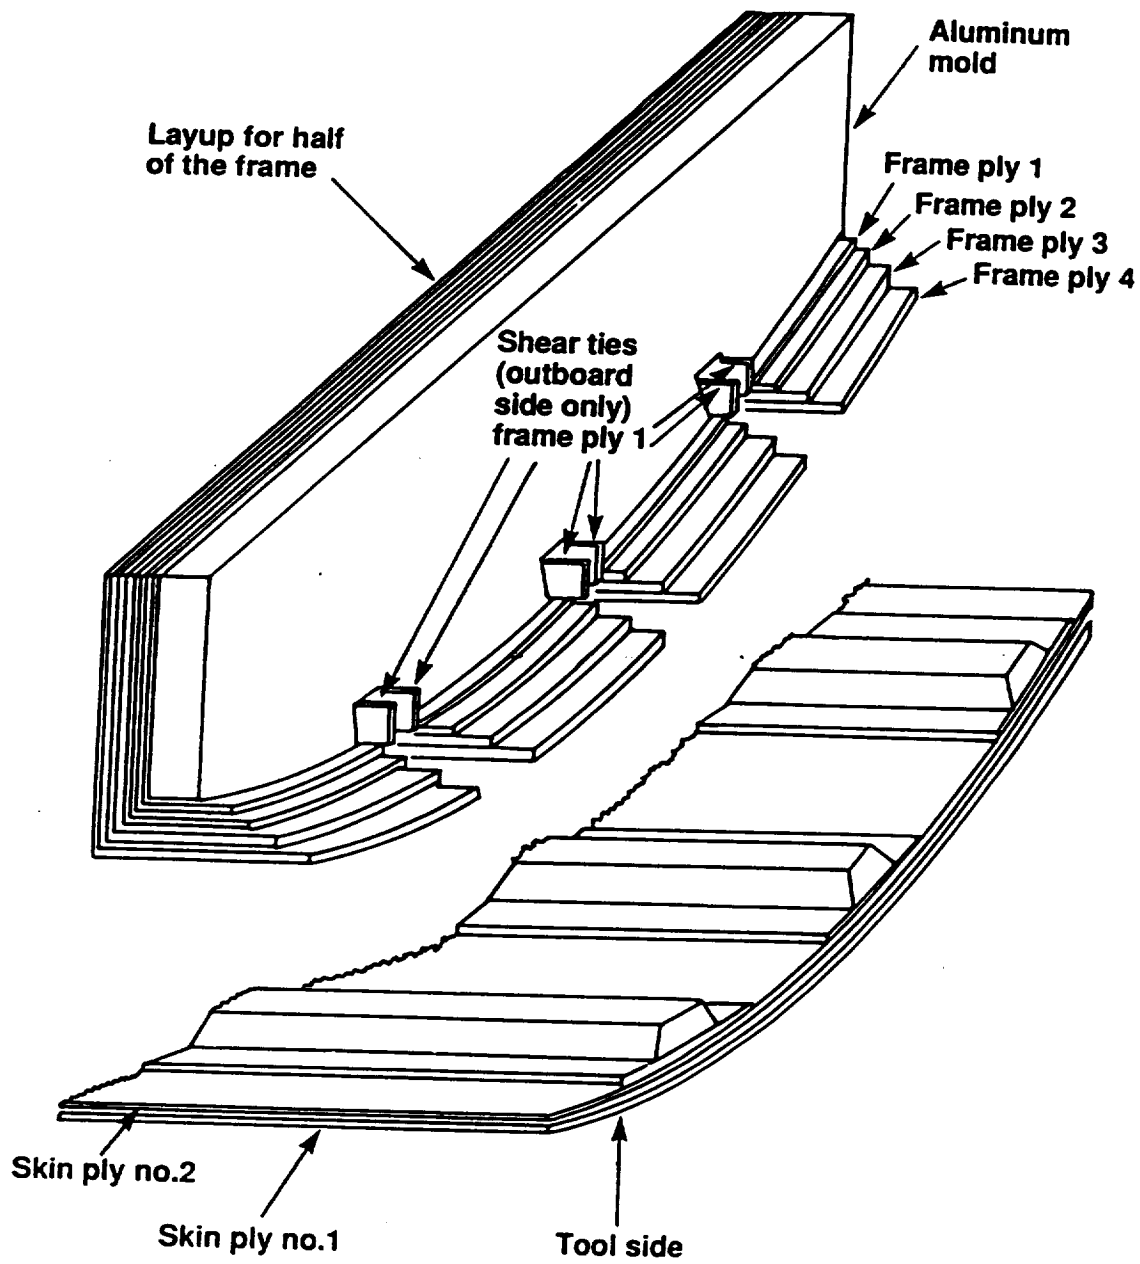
DETAIL OF ASSEMBLY DURING LAYUP OF FULL-SCALE PANEL.
